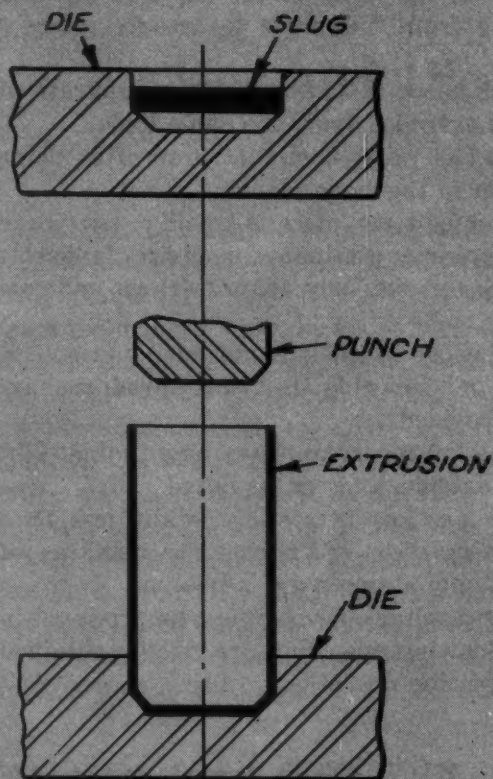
Common Form of Impact Extrusion Die, Showing the Slug before it is Struck and the Resulting Extruded Cup
